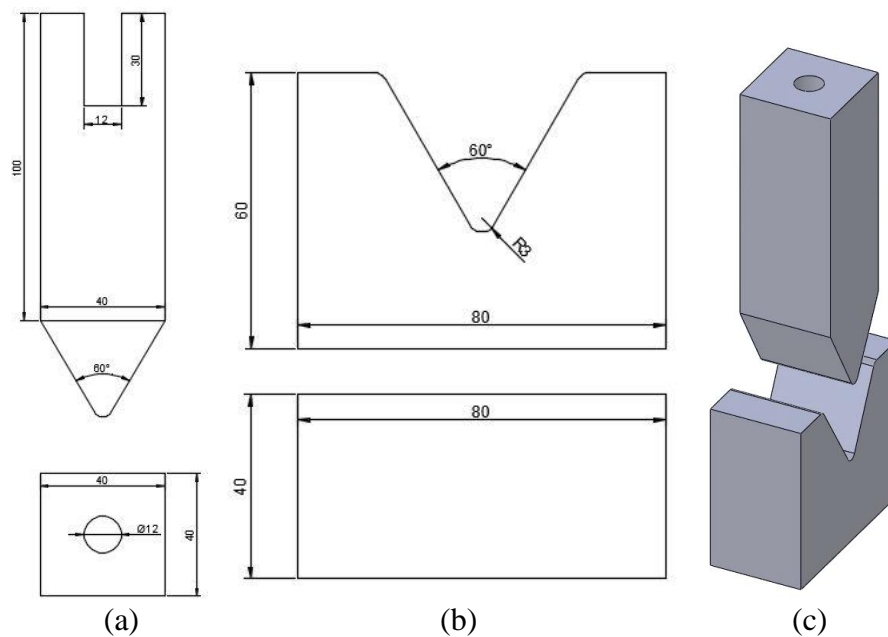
Schematic view of (a) 2D punch dimensions, (b) 2D die dimensions and (c) combined punch and die in a 3D CAD model
